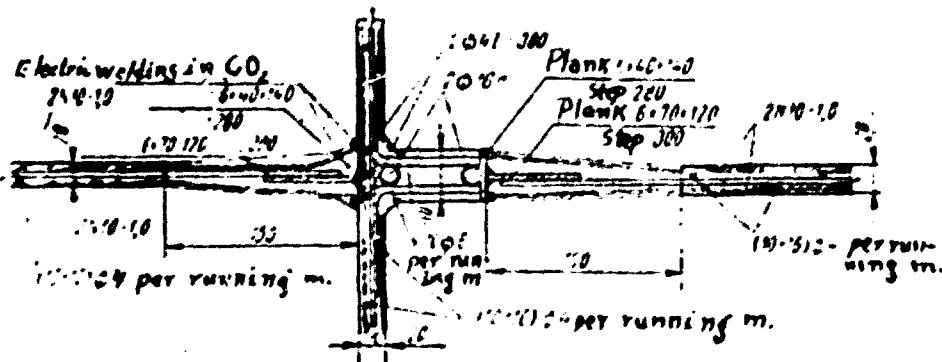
Connecting the Bulkhead Plate with the Bottom Framing.
